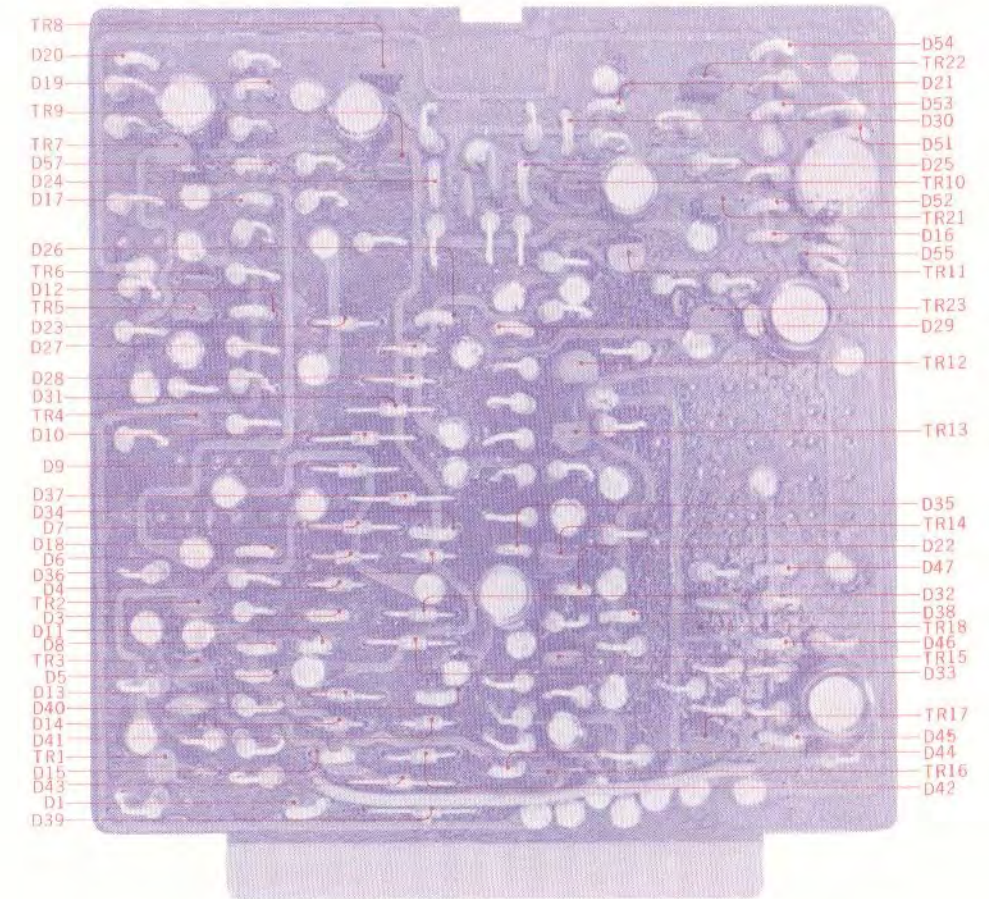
PHOTO OF RELAY P.C. BOARD (KJ-1011) BLOCK
